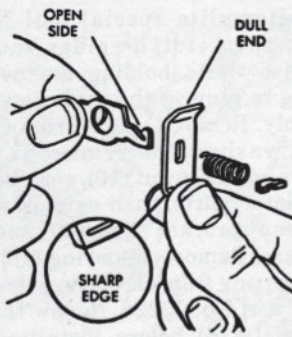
If Fairbanks-Morse starter friction shoe assembly is disassembled, be sure to reassemble as shown.
